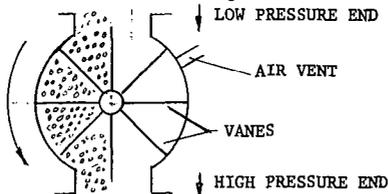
Schematic Of A Rotary Air Lock Feeder With Eight Wiper Vanes
